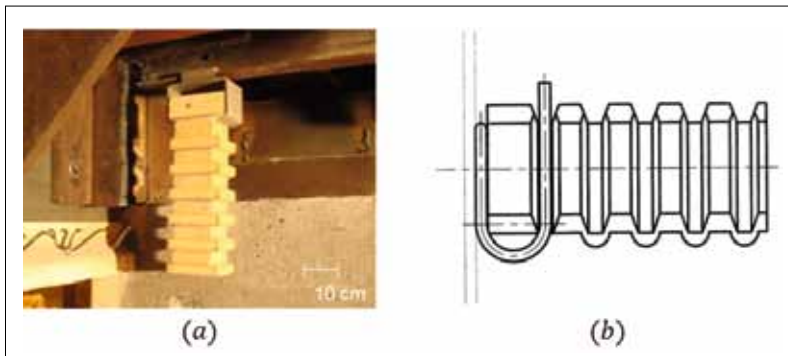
b Ceramic anchor coupled to a C-shaped clip welded to an external beam (a), and diagram illustrating the installation of a ceramic anchor with a U-shape clip directly welded to the vessel shell (b)
